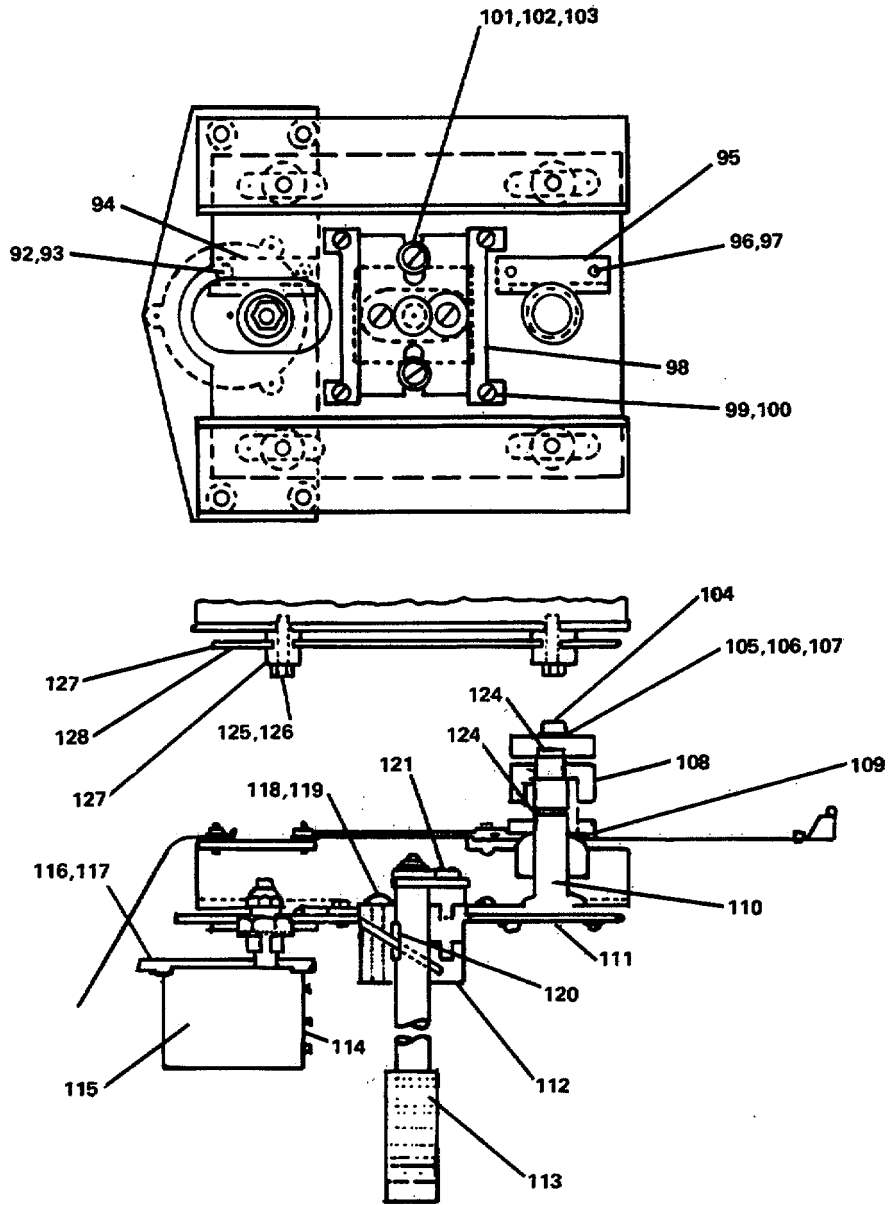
Replace/Repair Drum Assembly (Sheet 4 of 4).
